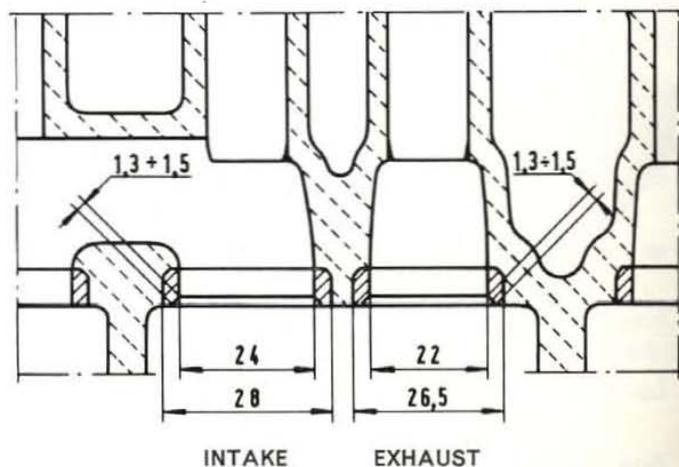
Critical dimensions (metric) of valve seats in head.
